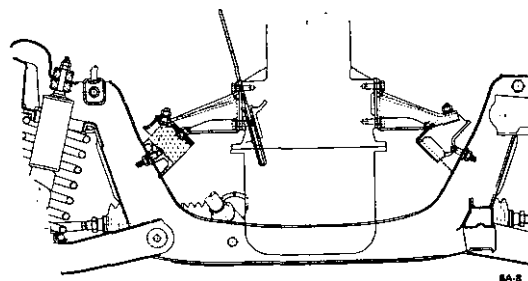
A-8 Engine Mount Bolts • Opel 1900 and Manta Series
